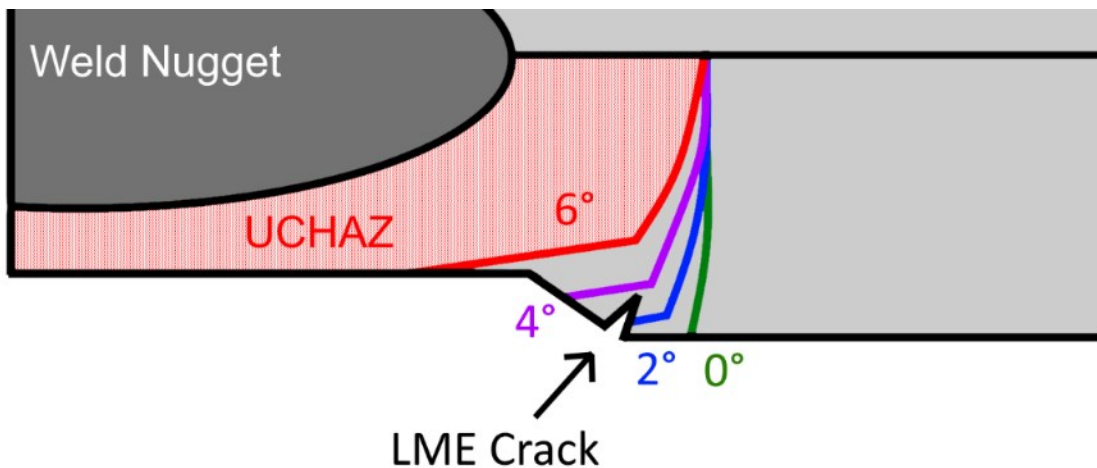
Schematic showing the HAZ moving away from the weld shoulder with increasing angular misalignment while the LME crack location is stationary
